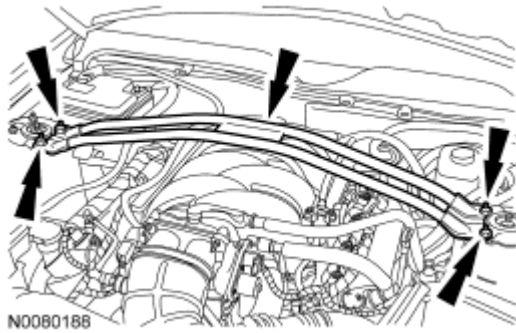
Locating Strut Tower Cross Brace & Nuts
